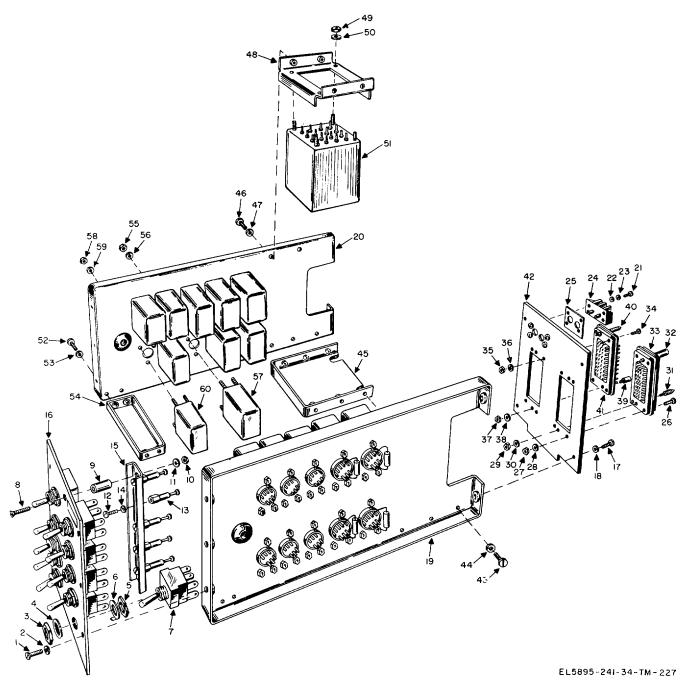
Control, Transmitter C-3446/FSW-8 (part of OA-2055/FSN-8), exploded view.
